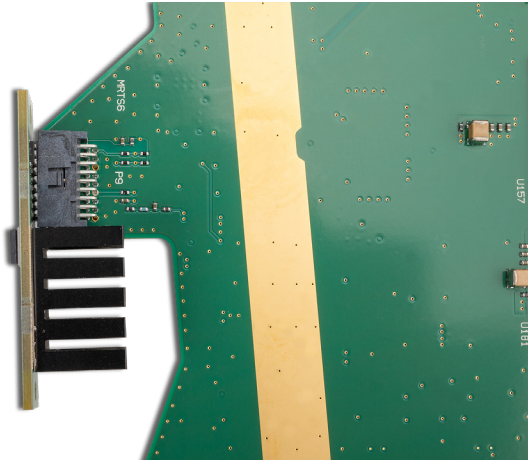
Close-up view of a new RF front end using Keysight ASIC technology
